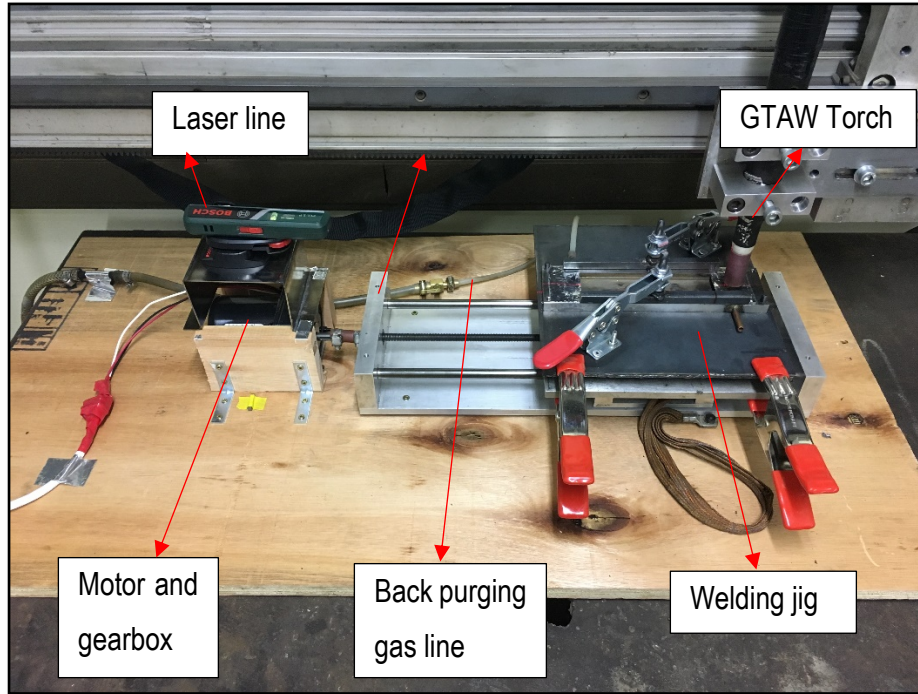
Weld setup used for experimentation, fully isolated from electrical interference and set up with a laser line for consistently accurate welds
